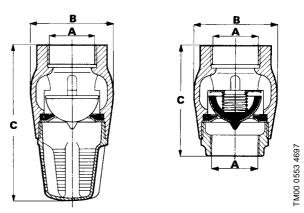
Dimensional sketch, BV, MV 3/4" to 3"
